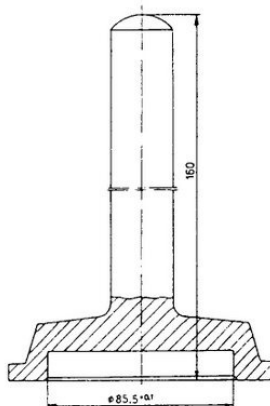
Mandrel for knocking of sealing ring in a cylinder block (flywheel side)
